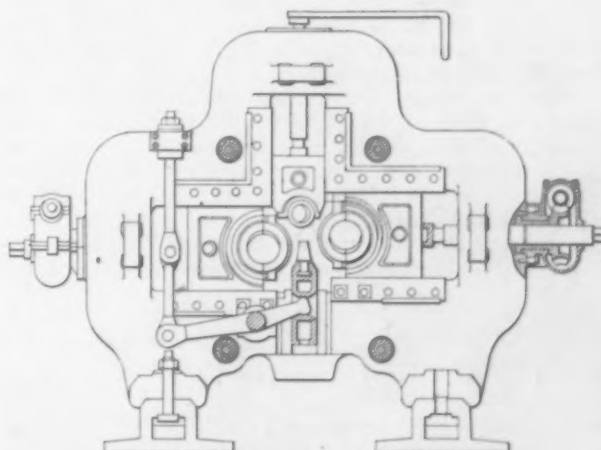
Roll Housing of the 14 $\frac{1}{4}$ -in. Oblique Rolling Mill, Showing Worm Gearing for Adjusting Obliquity of Rolls, Arrangement of Lower Guide and Screw Adjustment of Top Roll
